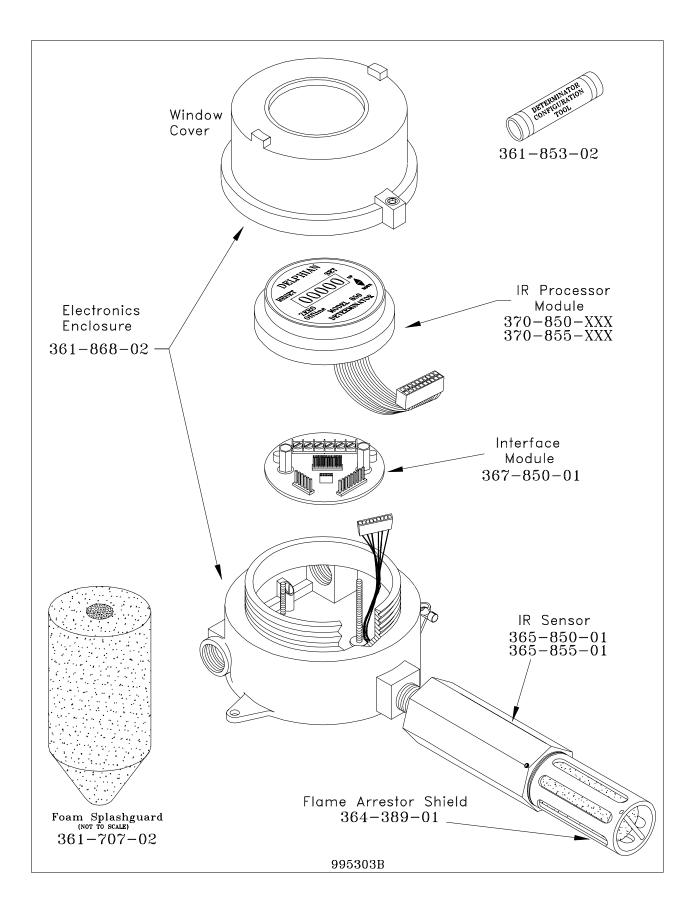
FPIR Detector Head In Sections (Drawing # 995303)
